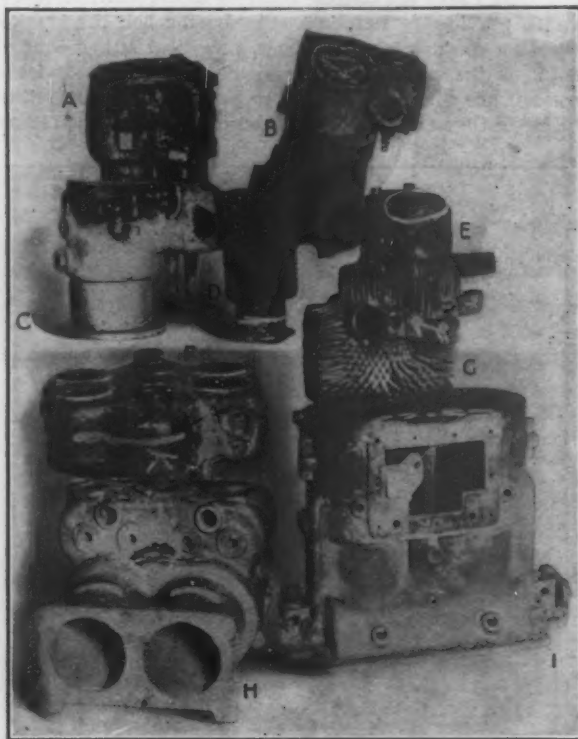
A Group of Automobile Engine Cylinders Repaired by Welding with the Oxy-Acetylene Torch.
